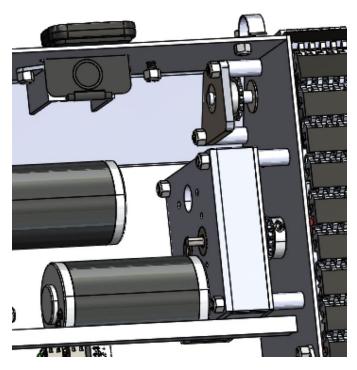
Left hand gearbox and bearing block assembled, without chain.
